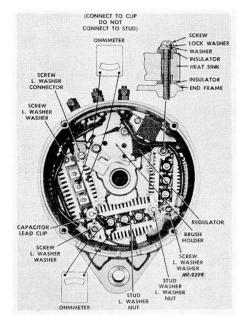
Parts Stack-Up and Ohmmeter Checks (Stator and Diode Trio Removed)
